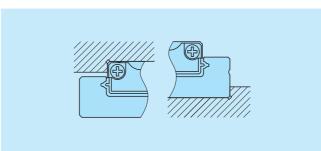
Relieved fillet at the corner of the mating reference mounting surfaces
